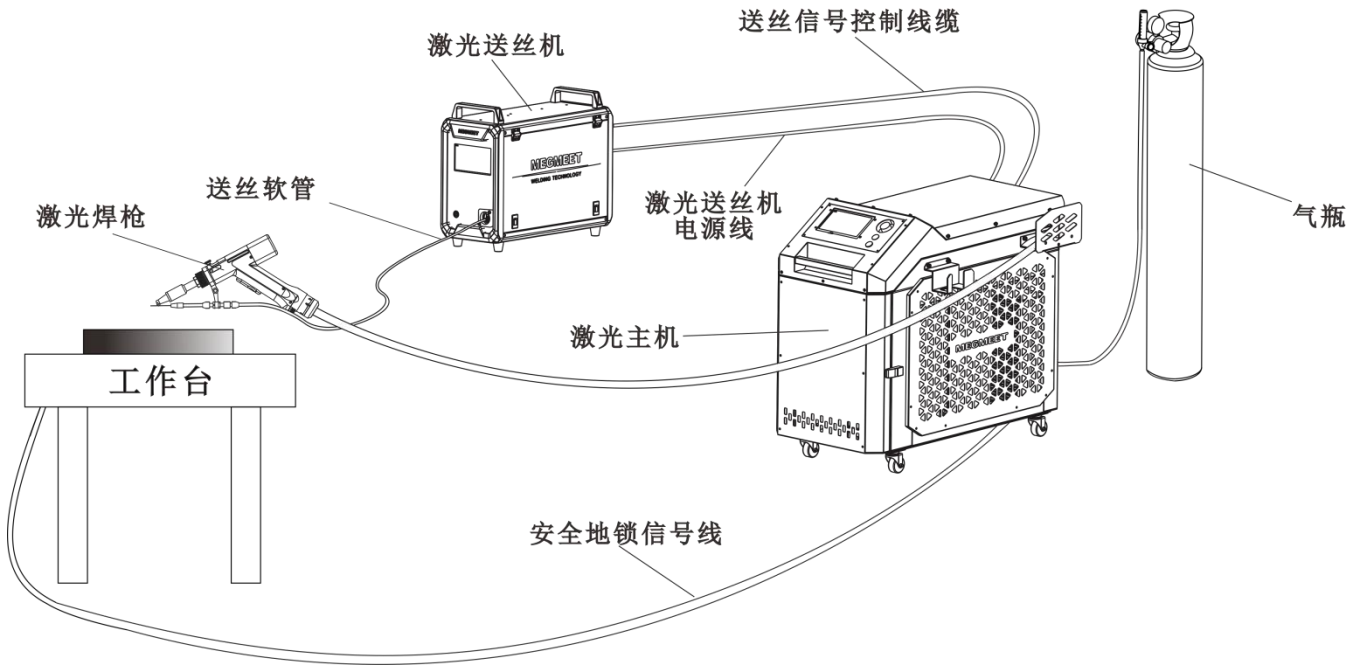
Connection diagram of hand-held fiber laser welding system configuration
